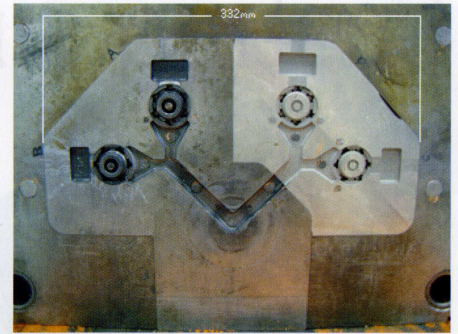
MetalCopy and steel inserts in the diecasting tool
